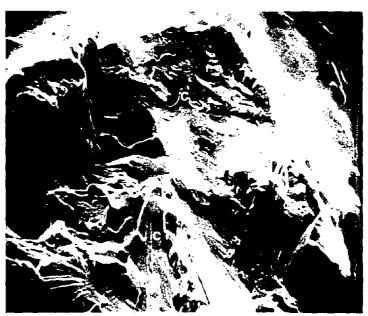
FRACTURE SURFACE OF SAMPLE 002 AT THE NOTCH TIP
